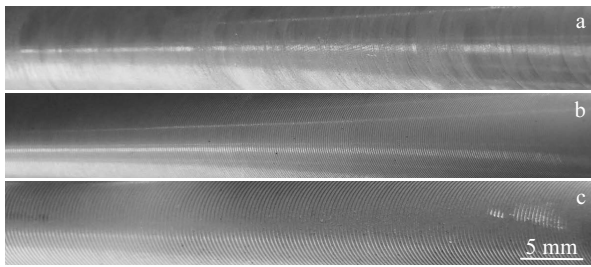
Surface appearance of FSW joint group with the welding speeds of 100 mm/min (a), 500 mm/min (b) and 900 mm/min (c) at a constant rotation speed of 1500 r/min
